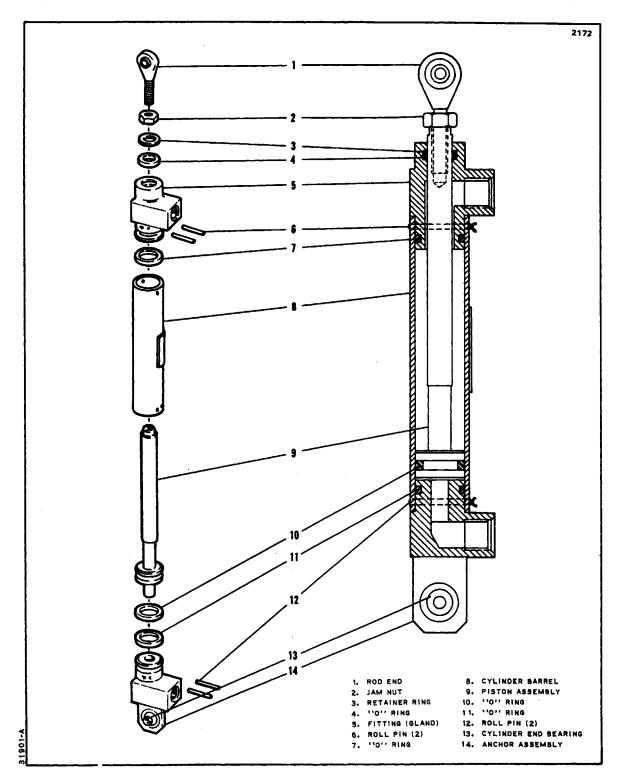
Main Gear Door Actuating Cylinder (451 845)
